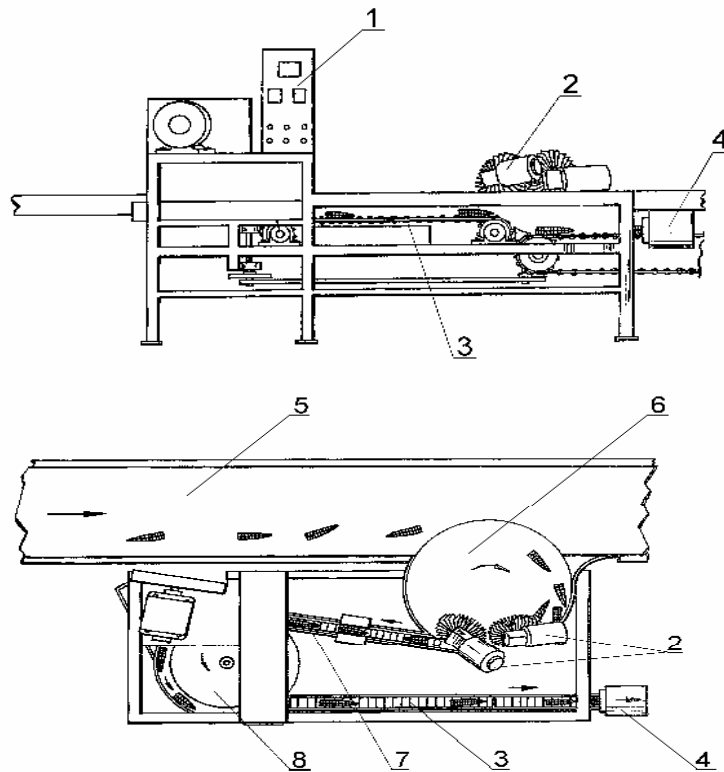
Device for corn cobs sorting and aligning: 1 – control system, 2 – rotary brushes, 3, 5, 7 – conveyors of cobs, 4 – cutter, 6 – rotary disc of the assembly, 8 – rotary disc for cobs alignment [113]
